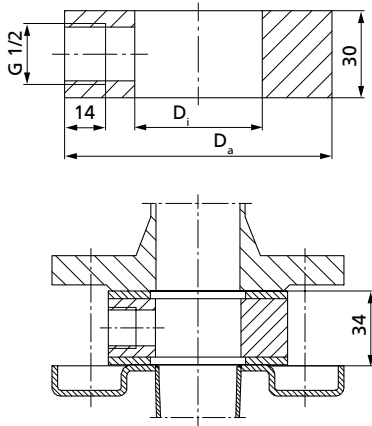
Dimensions of the pressure gauge connection (intermediate flange) [mm]
